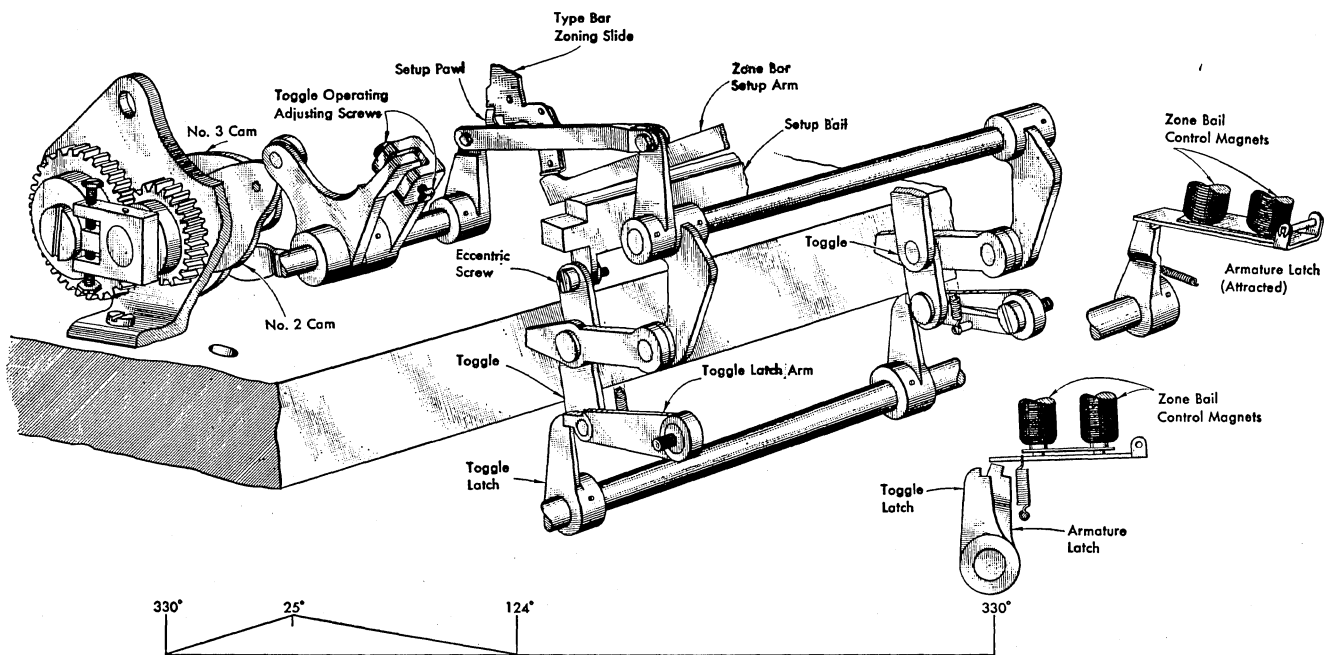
Zone Control Drive Unit, Cam 2 and Cam 3 Mechanism
